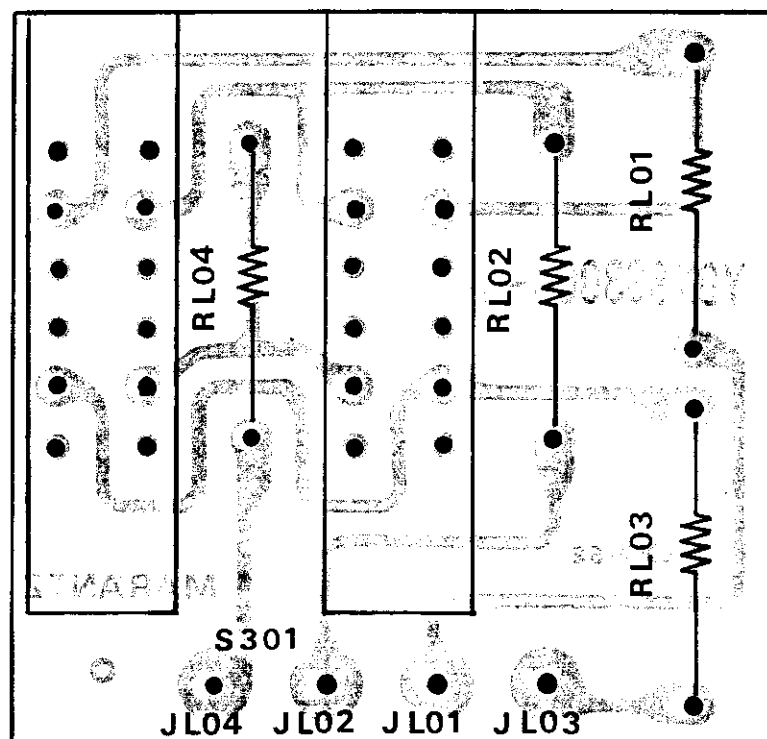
Main-Remote Speaker Switch Unit Assembly PL01 Component Locations
